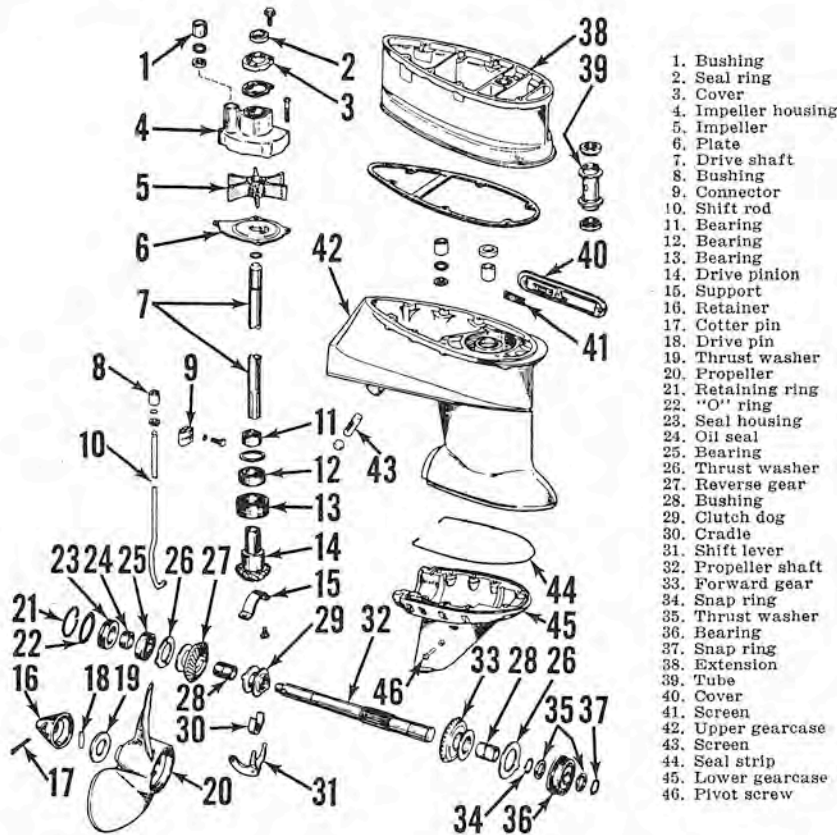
Exploded view of lower unit gearcase, water pump and associated parts used on 50 hp models. Items (38 & 39) are only used with "Long" models.
